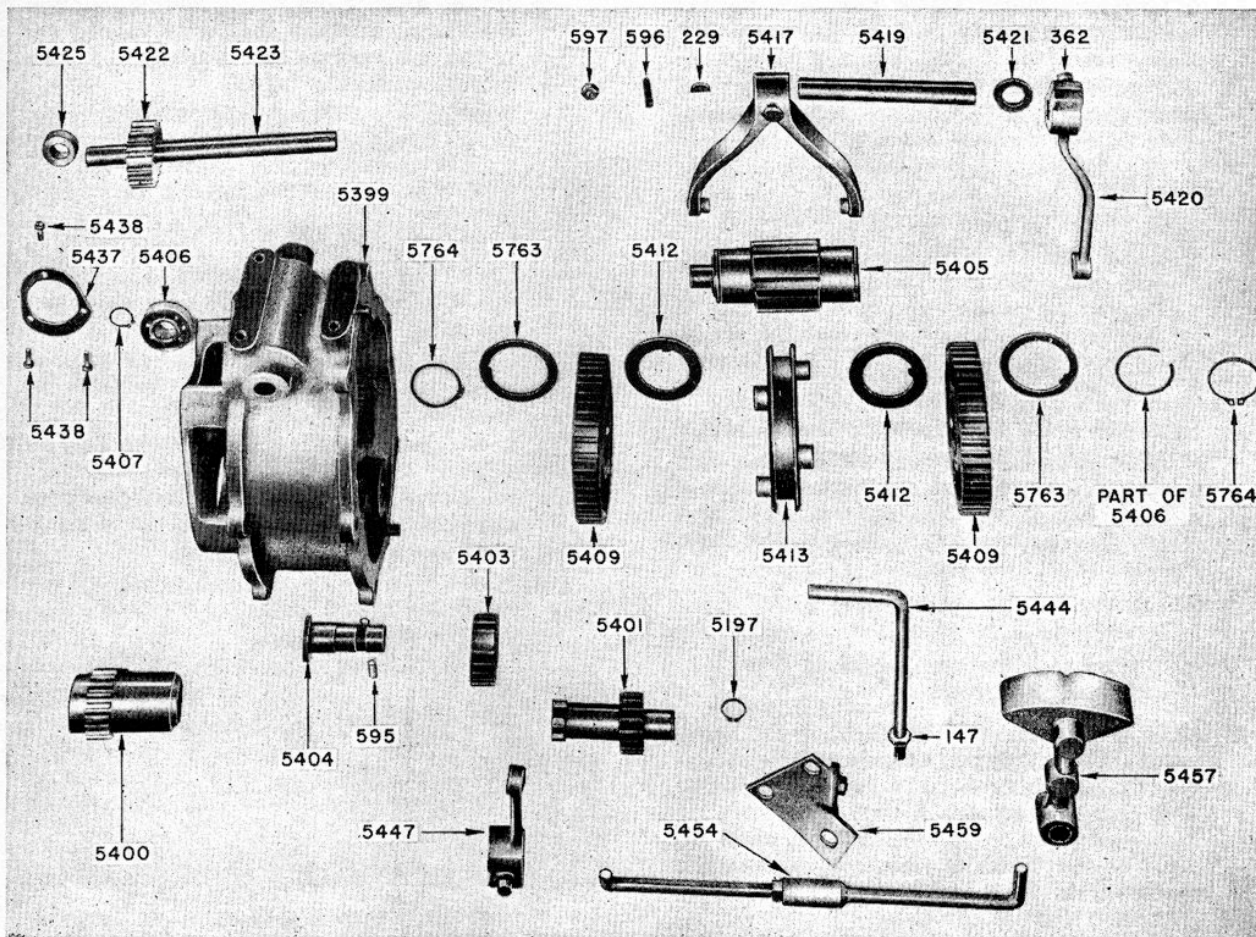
EXPLODED VIEW OF REVERSE GEAR
